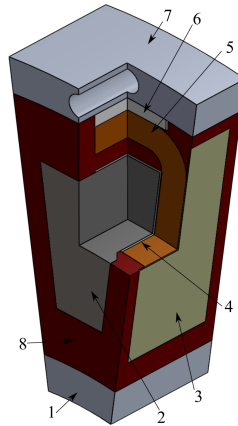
Concentrated winding tooth coil: (1) Aluminum thermal end-winding interconnection ring; (2) Laminated iron core; (3) Mica inter coil insulation sheet; (4) Mica slot liner; (5) Winding body; (6) Aluminum-oxide thermal pad; (7) Aluminum housing; (8) Epoxy potting.
